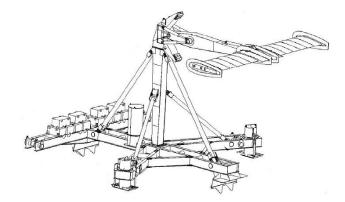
Oscillating hydrofoil, Stingray Assembly © Engineering Business Ltd 2005, source [11].
